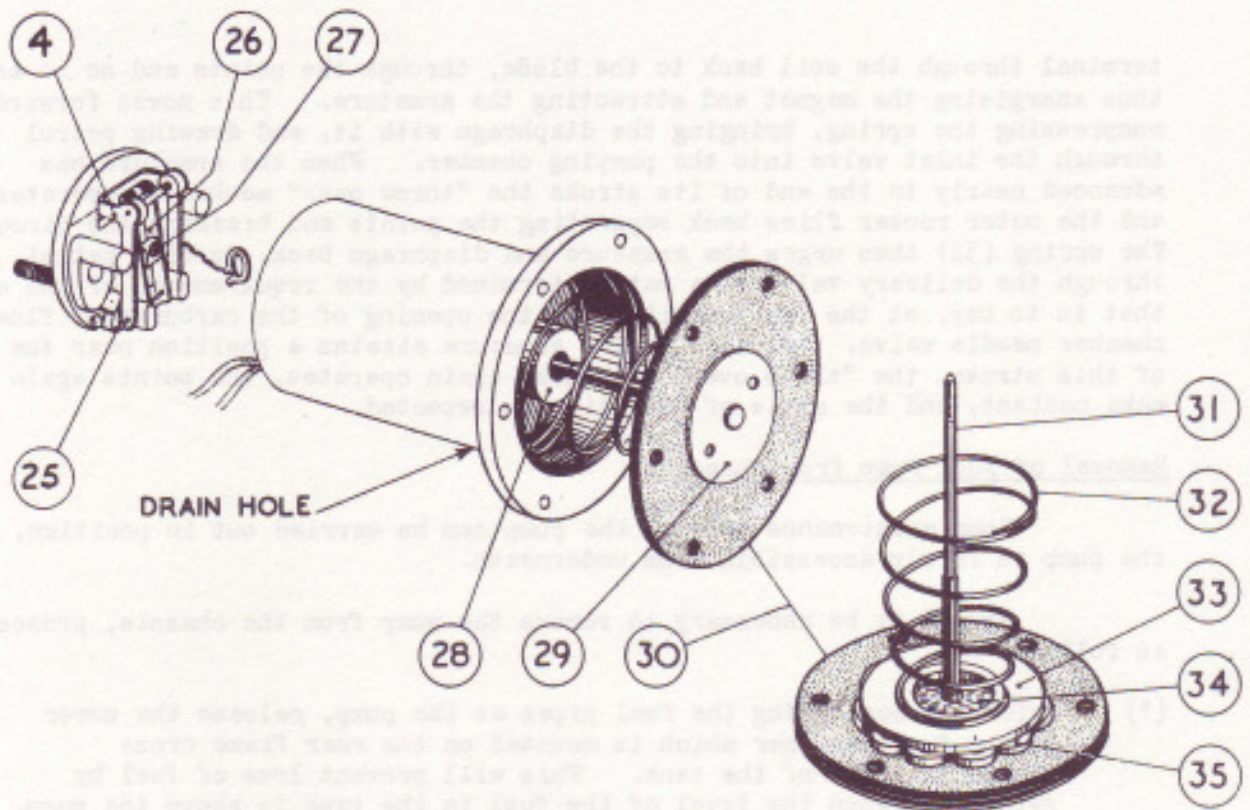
SHOWING CONTACT MECHANISM AND DIAPHRAGM ASSEMBLY.
